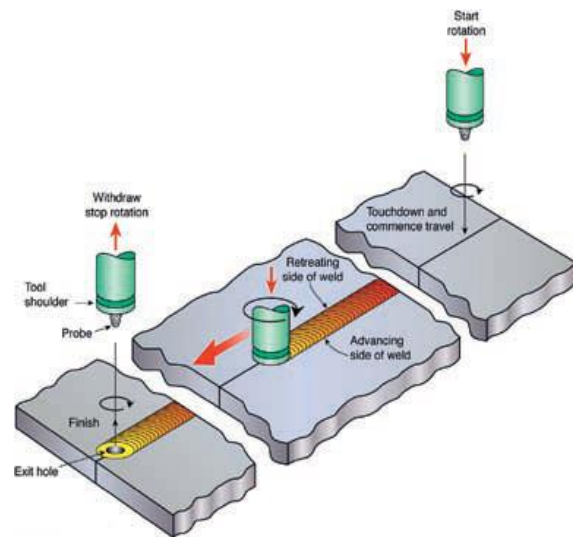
Principle of the Friction Stir Welding process for overlap joint configuration
